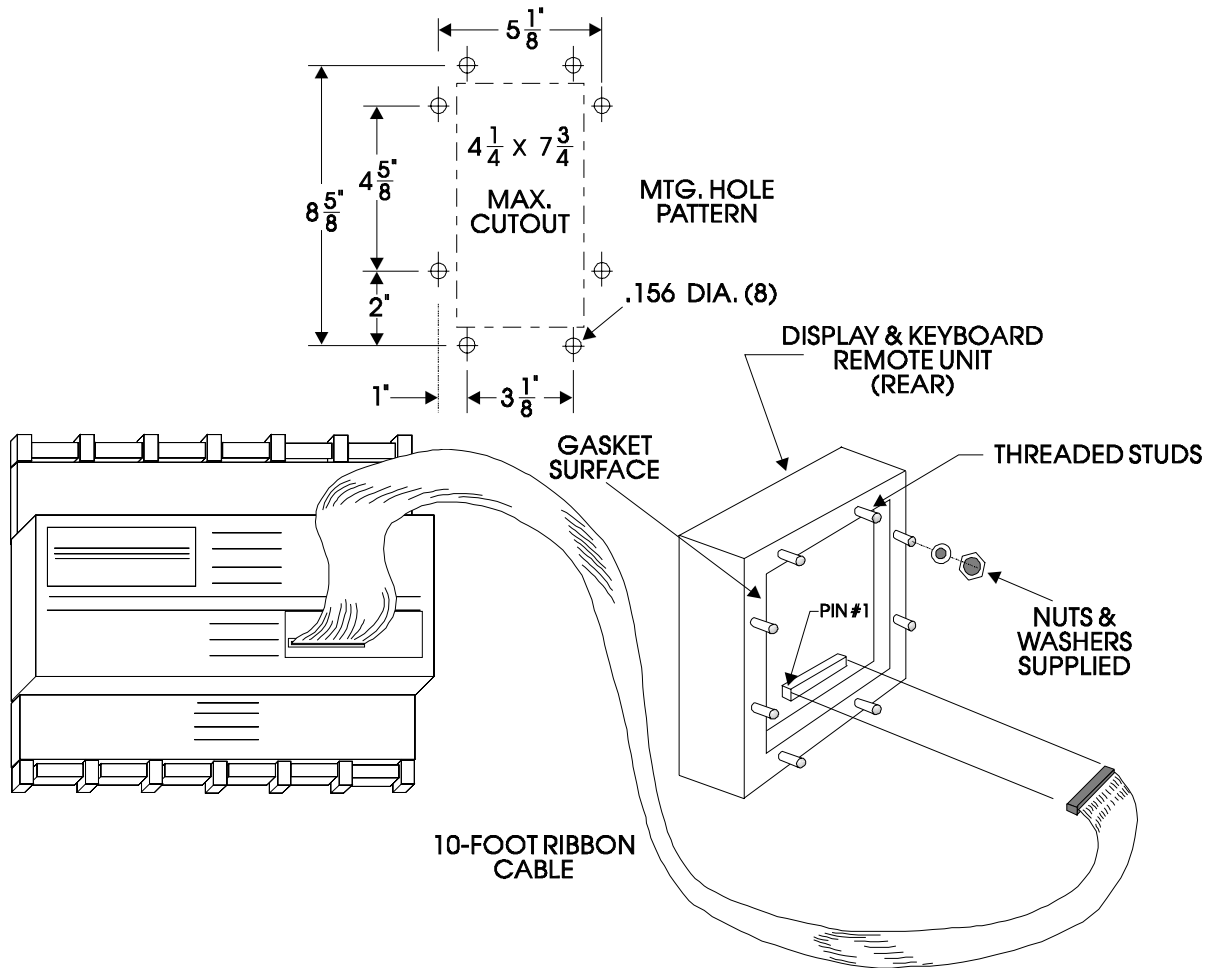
Extended Display Cable Connections and Mounting Dimensions
